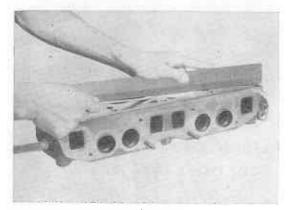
Checking Distortion of Cylinder Head Mating Surface
